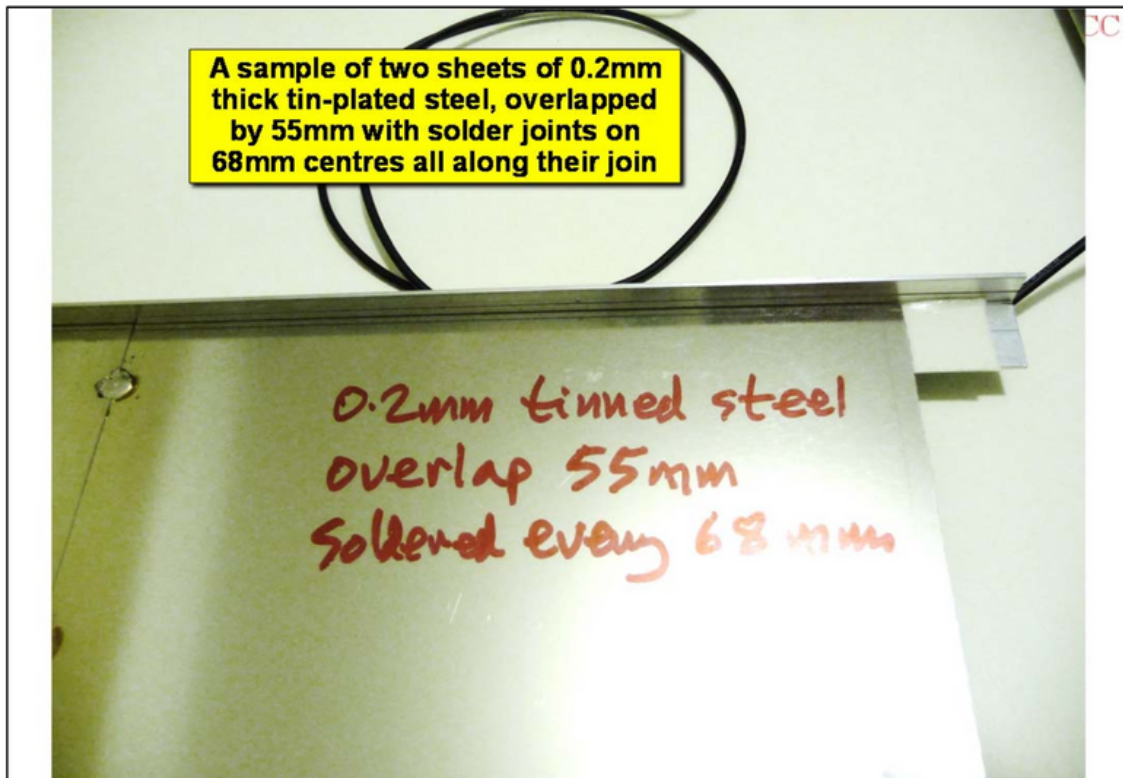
The 55mm overlapped tin-plated steel sheet to be tested
